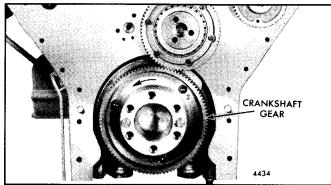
Crankshaft Timing Gear Mounting (R.H. Rotation Engine Shown)
